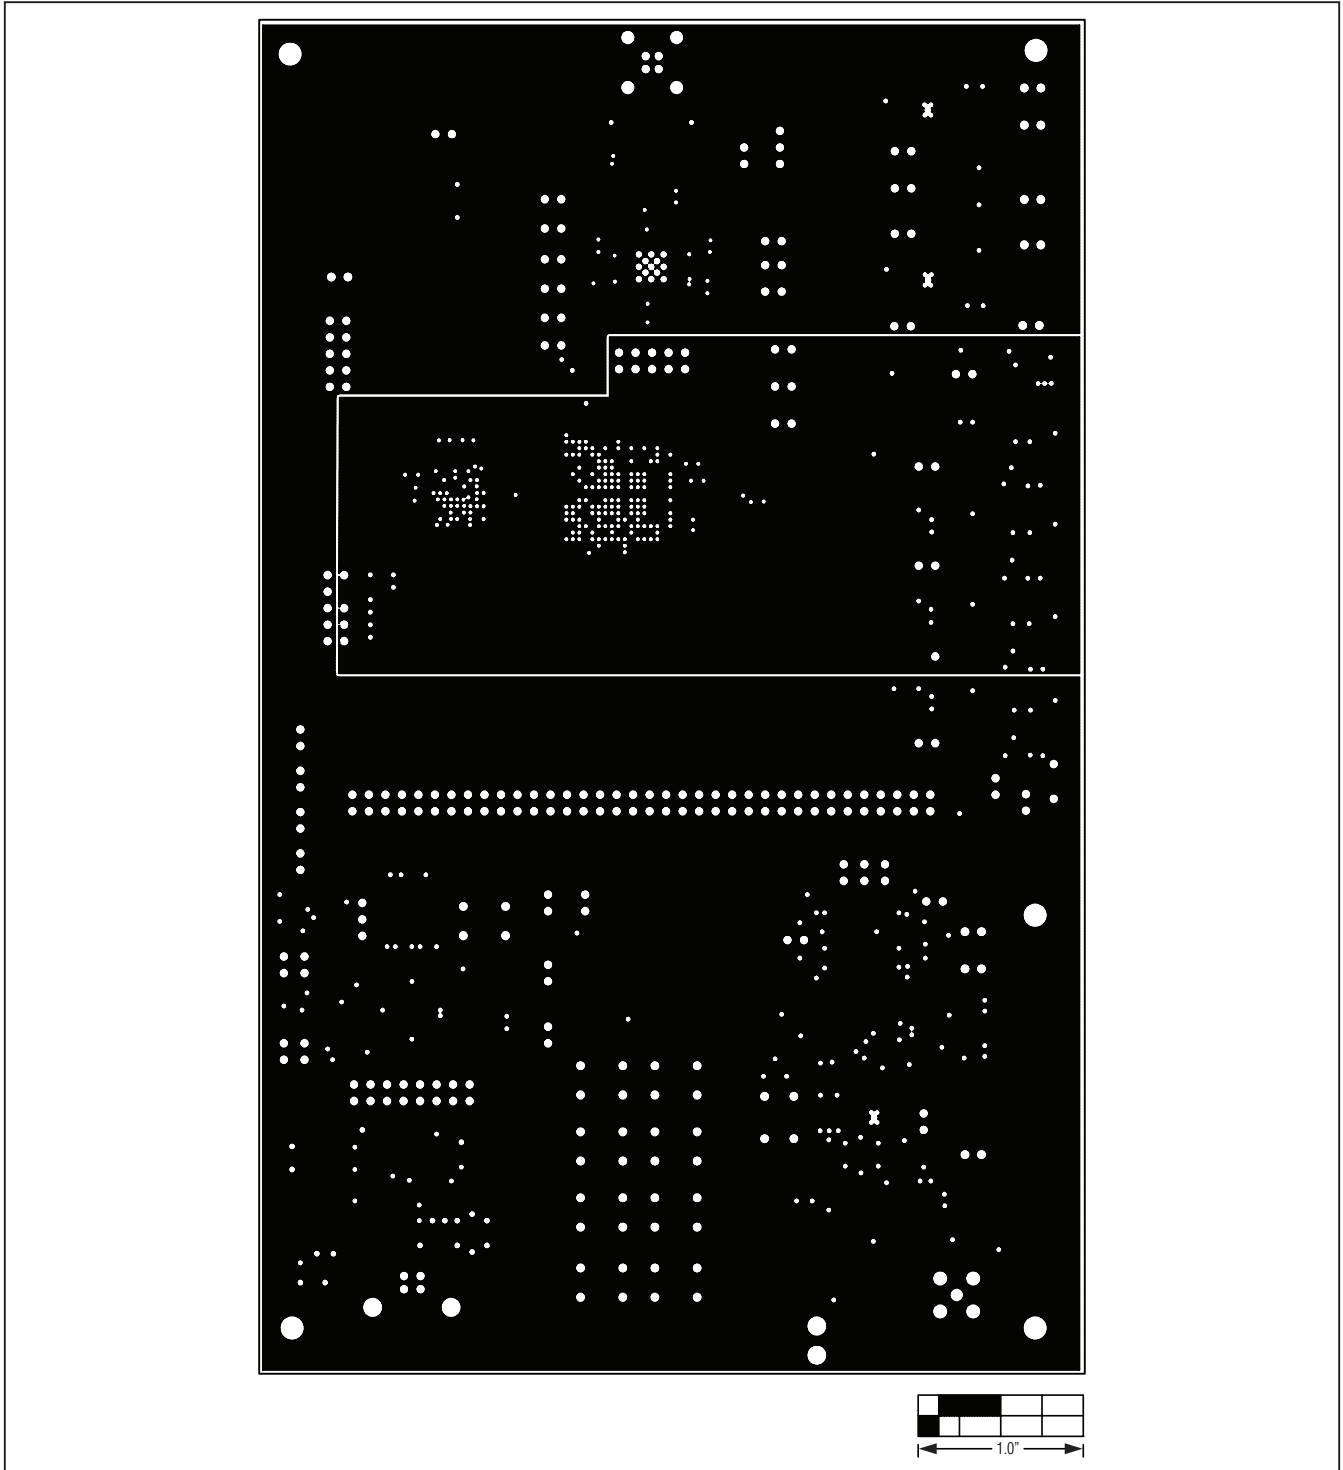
MAX9249 EV Kit PCB Layout—Power Layer 4
